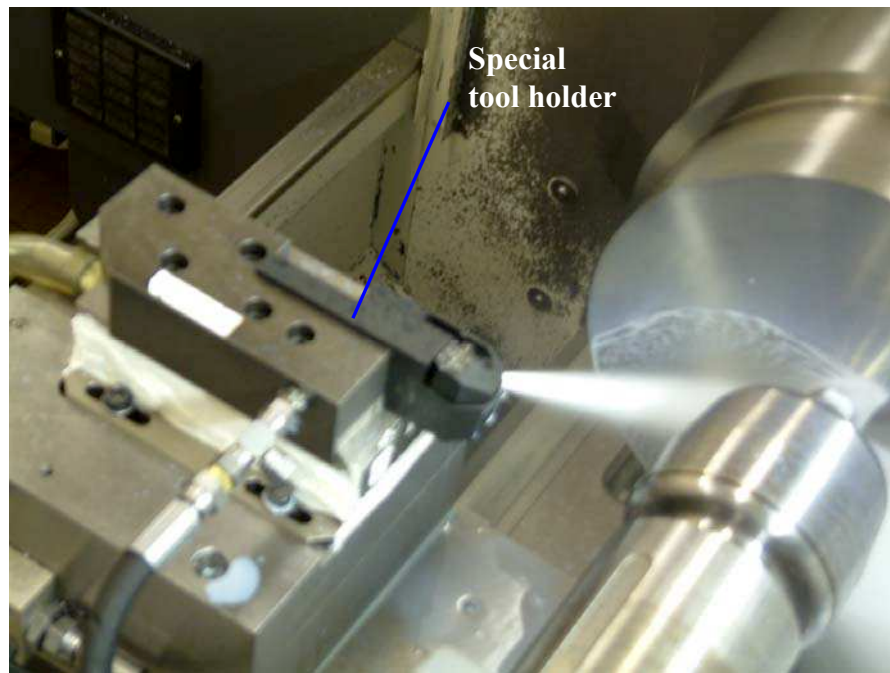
Special tool holder and a cutting fluid jet-pressure of 7 MPa supply.
